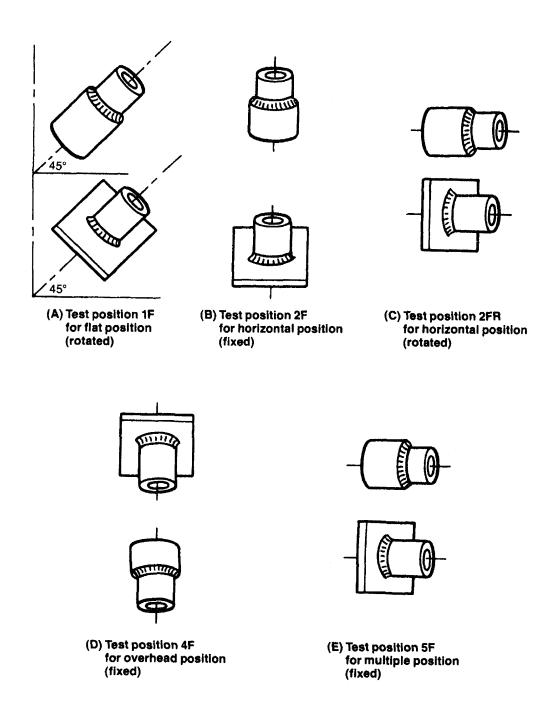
Positions of test pipes for fillet welds
